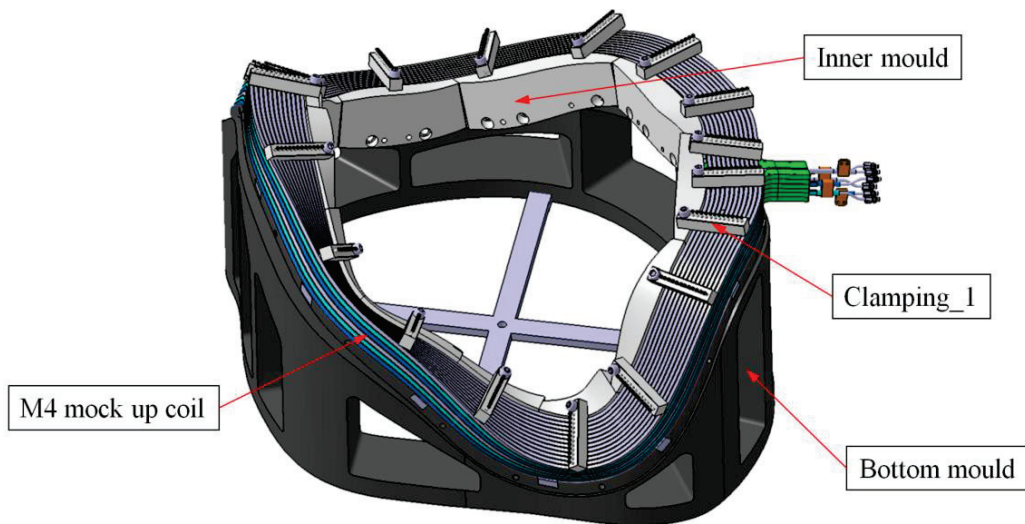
The winding mould for MC4 mockup coil.
